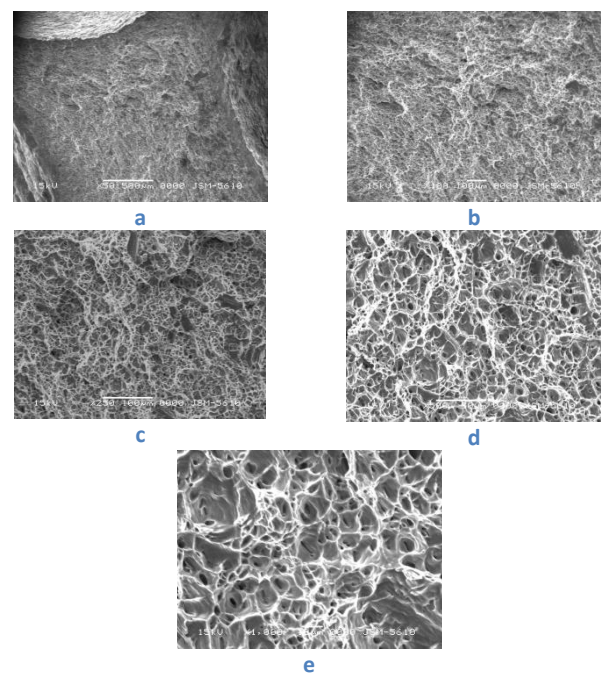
Fractrograph of weld sample prepared at 765 rpm tool rotation speed and 120 mm/min welding speed a. 50x b.100x c,250x, d. 500x, e. 1000x magnification
